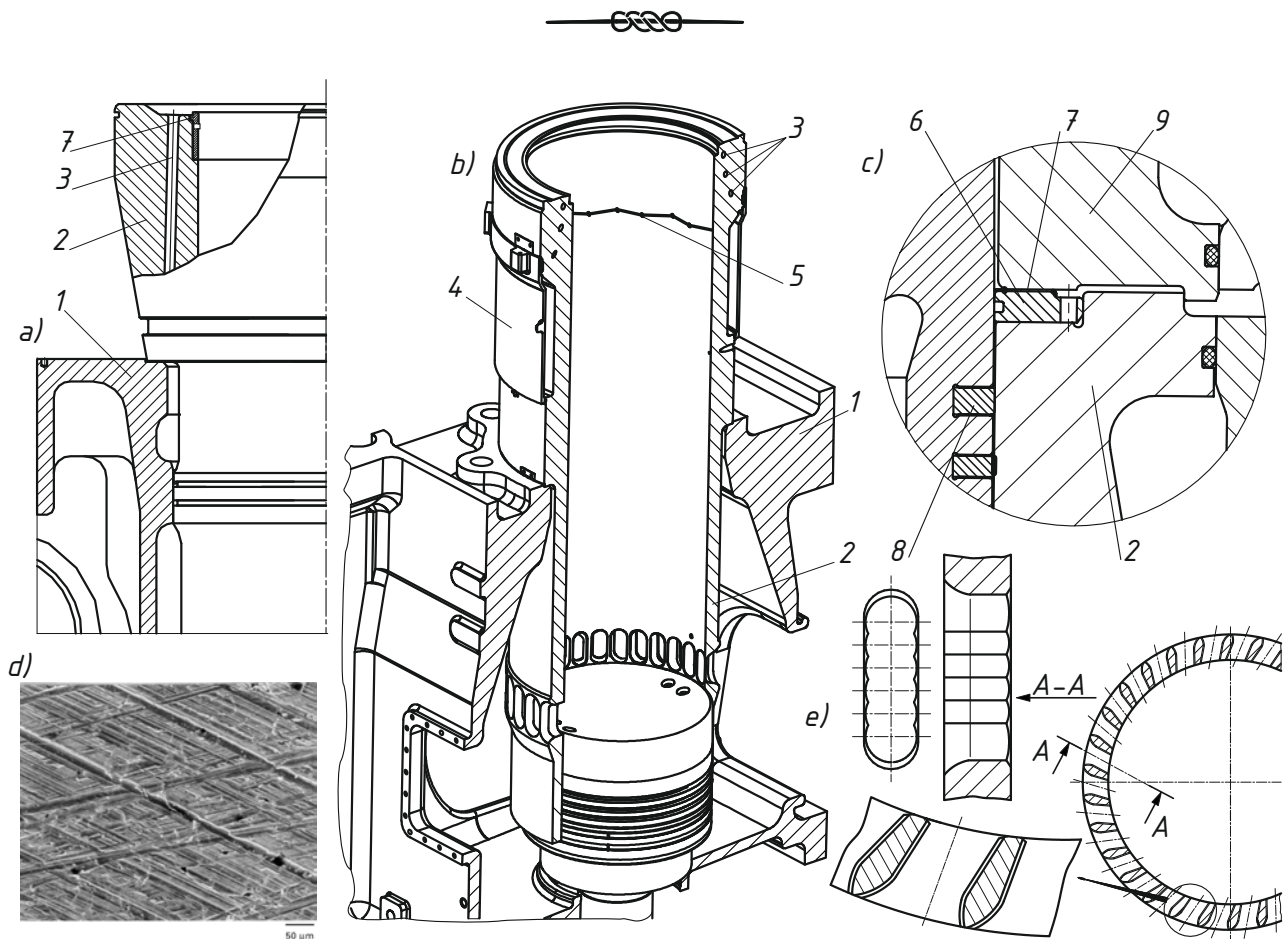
Design and installation features of modern marine engines working cylinders: *a* – installation of cylinder sleeve of Wärtsilä L46 engine; *b* – installation of spacer between cylinder block and sleeve (Wärtsilä RT-flex 82 C series engines); *c* – installation of anti-polishing ring in MAN low-speed engines; *d* – microrelief on the working surface of cylinder liner; *e* – cross-section and direction of blow-through ports of Wärtsilä RTA series engines. 1 – cylinder block; 2 – cylinder sleeve; 3 – coolant channel; 4 – cooling jacket; 5 – oil distribution grooves; 6 – anti-polishing ring; 7 – steel gasket; 8 – piston rings, 9 – cylinder cover (adapted from [16, 17, 18, 19])
